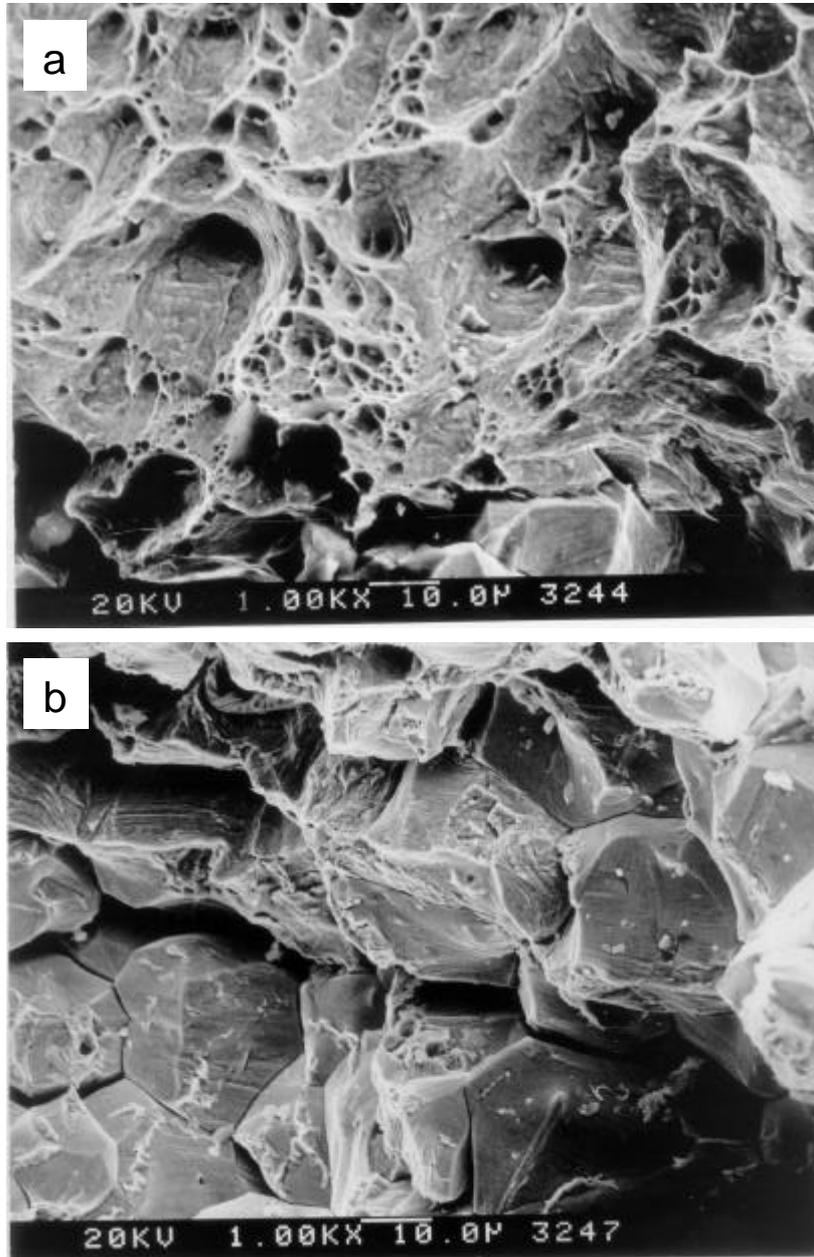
Fracture surface of hptest-7 which show mixed mode of fracture (a)ductile and b)brittle)
